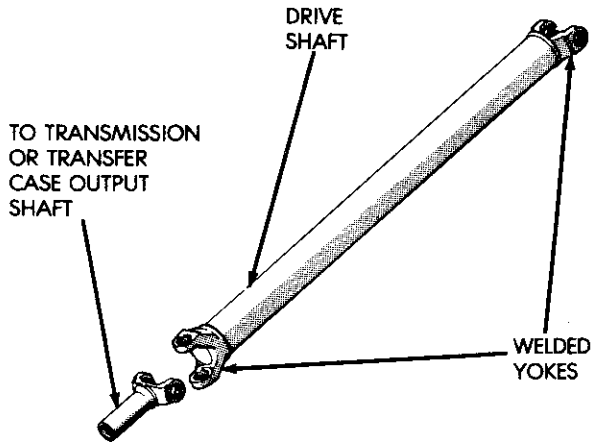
Rear Drive Shafts—MJ/XJ Vehicles
